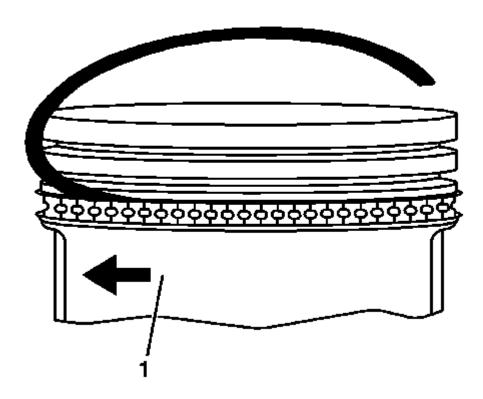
View Of Lower Oil Control Piston Ring Courtesy of GENERAL MOTORS CORP.
